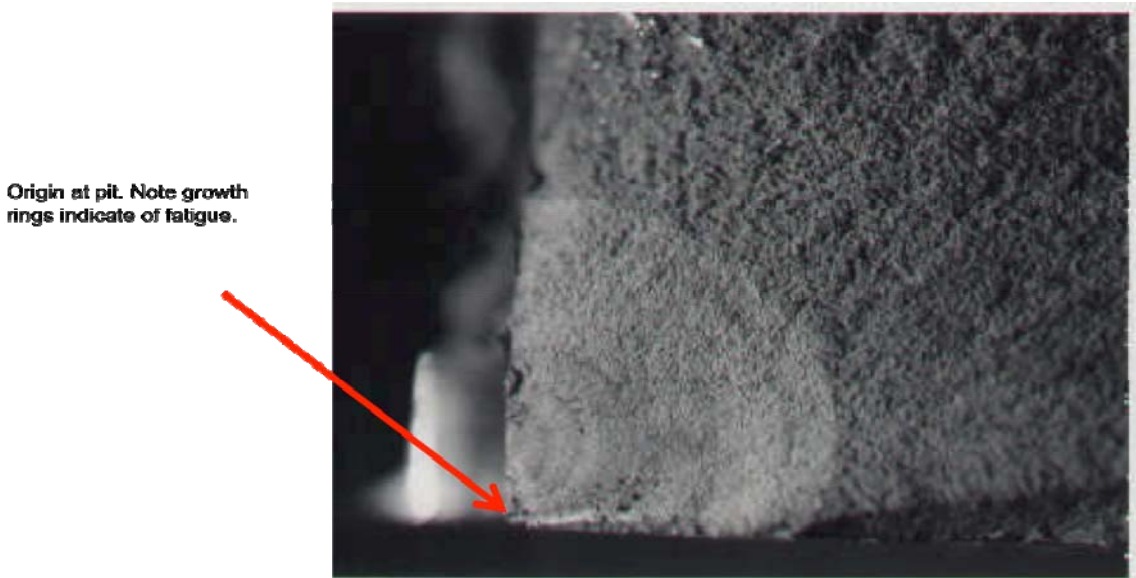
A Second View of the Fracture Surface of C130 “Porkchop” Fitting that Unexpectedly Failed from Pitting that Transitioned into Cracks.
